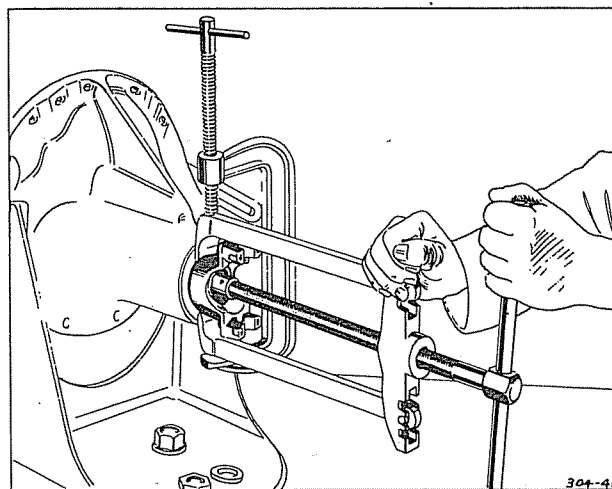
Removing Drive Pinion Flange With Puller CM 549.
